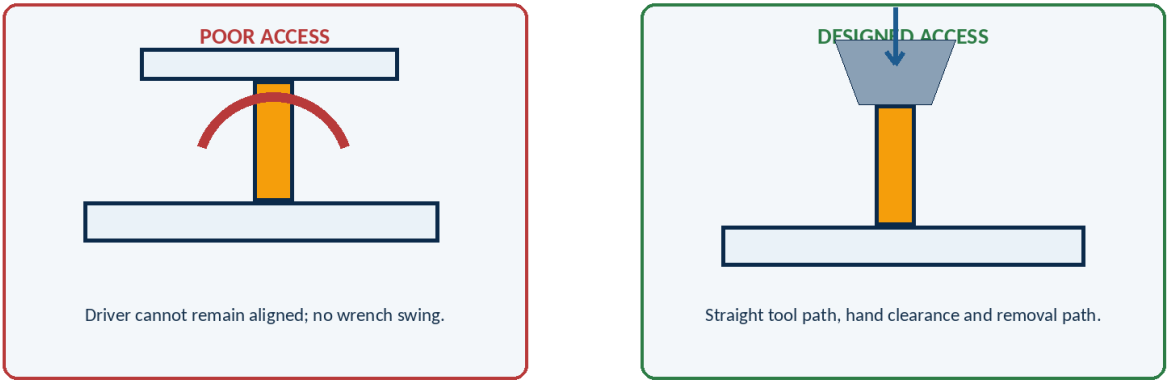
Tool alignment and removal paths must remain available in the final assembly state.
